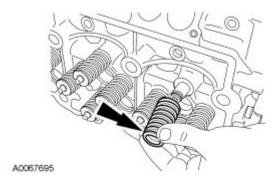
Installing Valve Spring Courtesy of FORD MOTOR CO.
